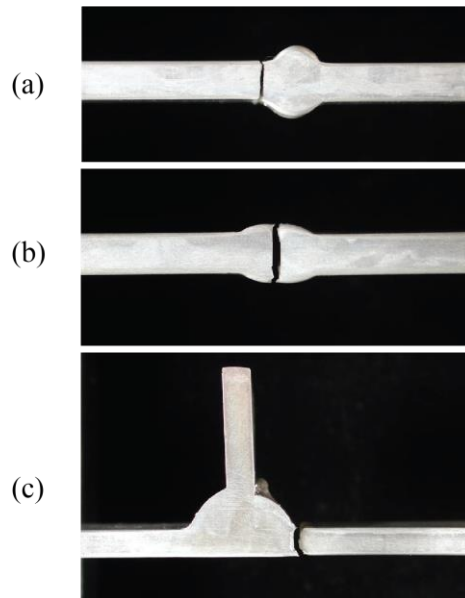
Illustration of three joint types tested [111]: (a) full penetration butt joint; (b) partial penetration butt joint; (c) T-joint.
